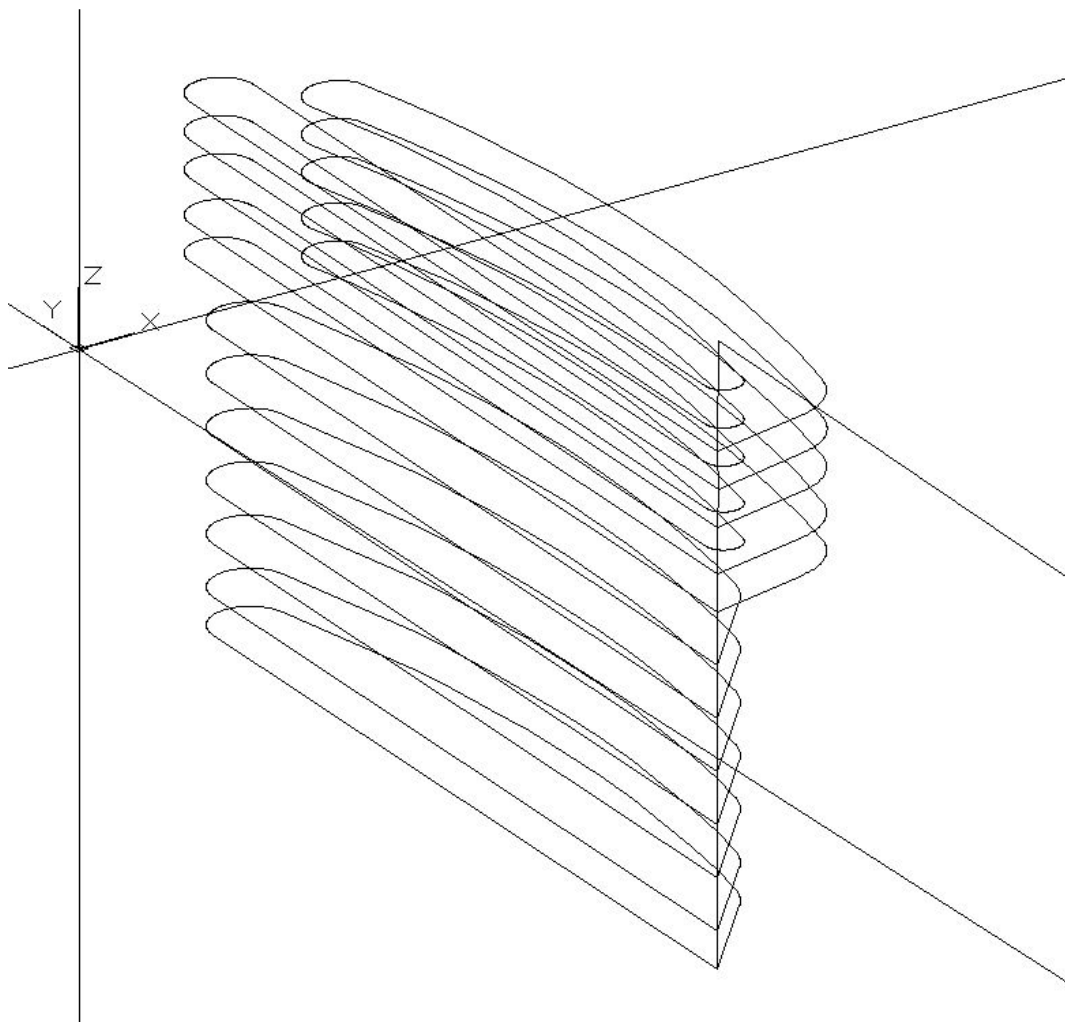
Heel Radiusing Tool Path. The heel shaping path shapes the top and mid section of the heel to meet the rim.
